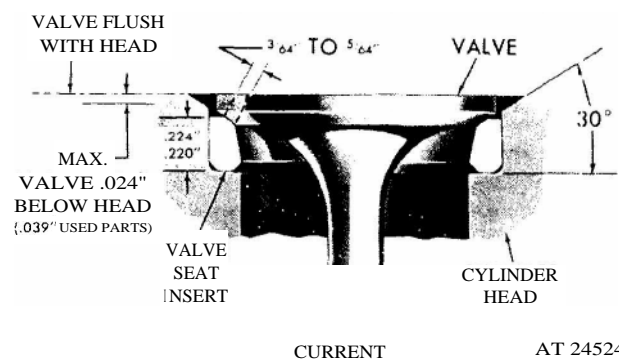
Relationship between exhaust valve, insert and cylinder head (four valve head).
